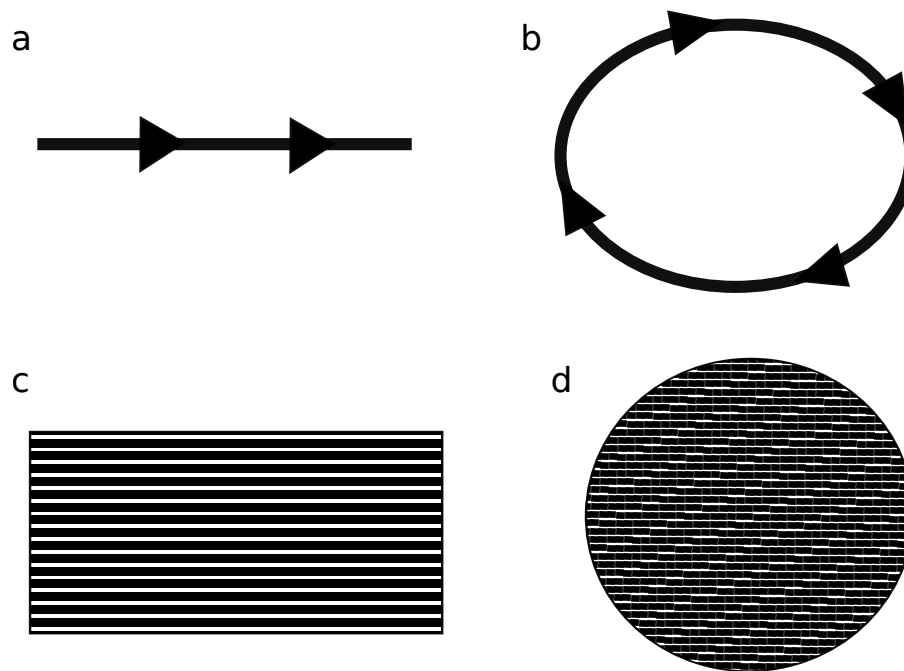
Trajectories to follow up during melting: (a) single weld track; (b) circular weld track; (c) rectangular weld surface; (d) circular weld surface.
